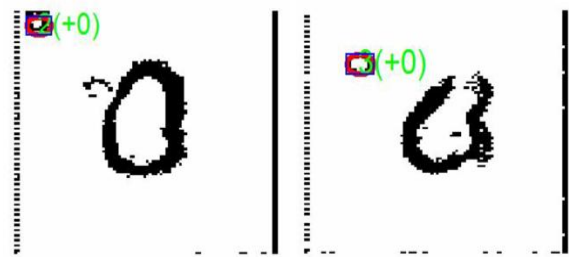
Examples of tracked spatters in laser welding scenario.
